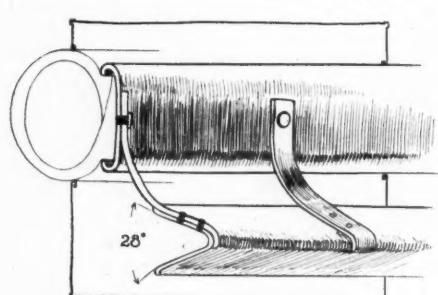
METHOD OF FASTENING V-BELT RIMS TO WHEELS
